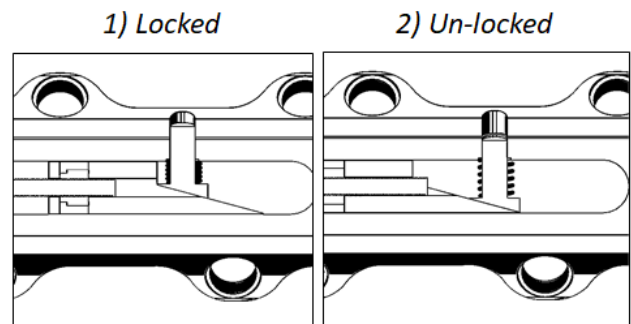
Detail of the locking mechanism in the locked (1) and un-locked (2) configurations.
